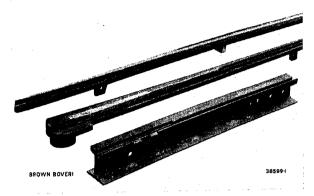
Lengths of rail repaired by means of electric-arc welding and electrically welded connecting pieces.
